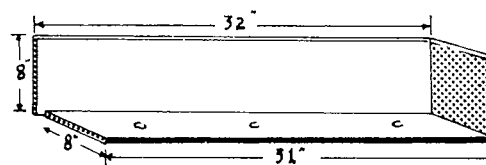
Dimensions for a window box. Box should be slightly longer than window is wide.
